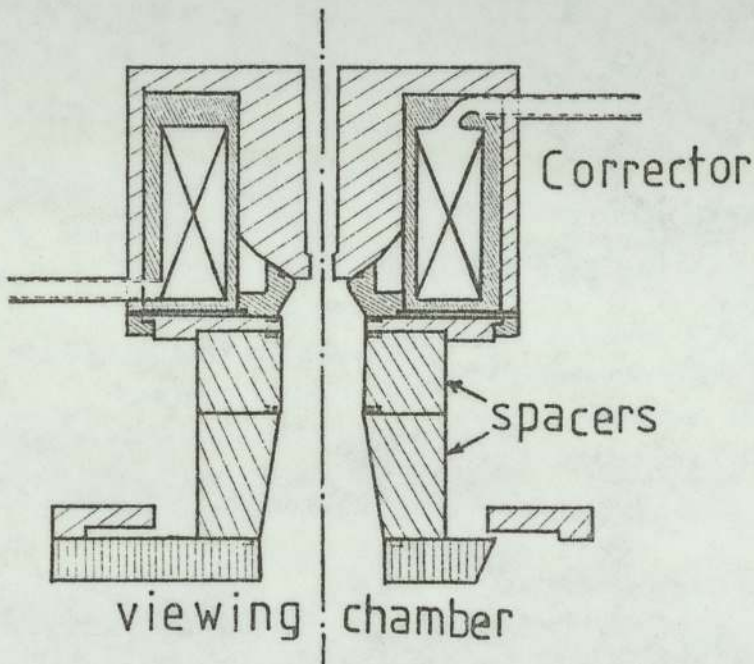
Cross-section of the corrector lens, duralumin spacers and the top flange of the viewing chamber.
